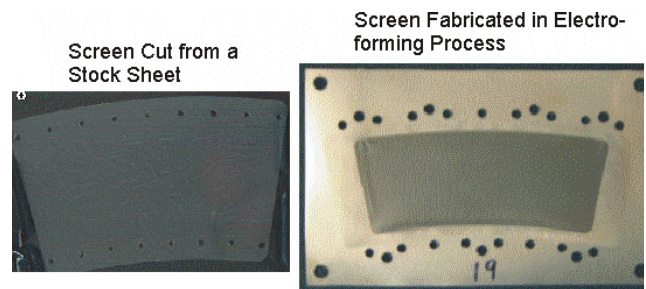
PHOTOGRAPHS OF AN ELECTROFORMED SCREEN CUT AND PUNCHED FROM SHEET STOCK AND A SCREEN WITH A BORDER FABRICATED IN AN ELECTROFORMING PROCESS.
